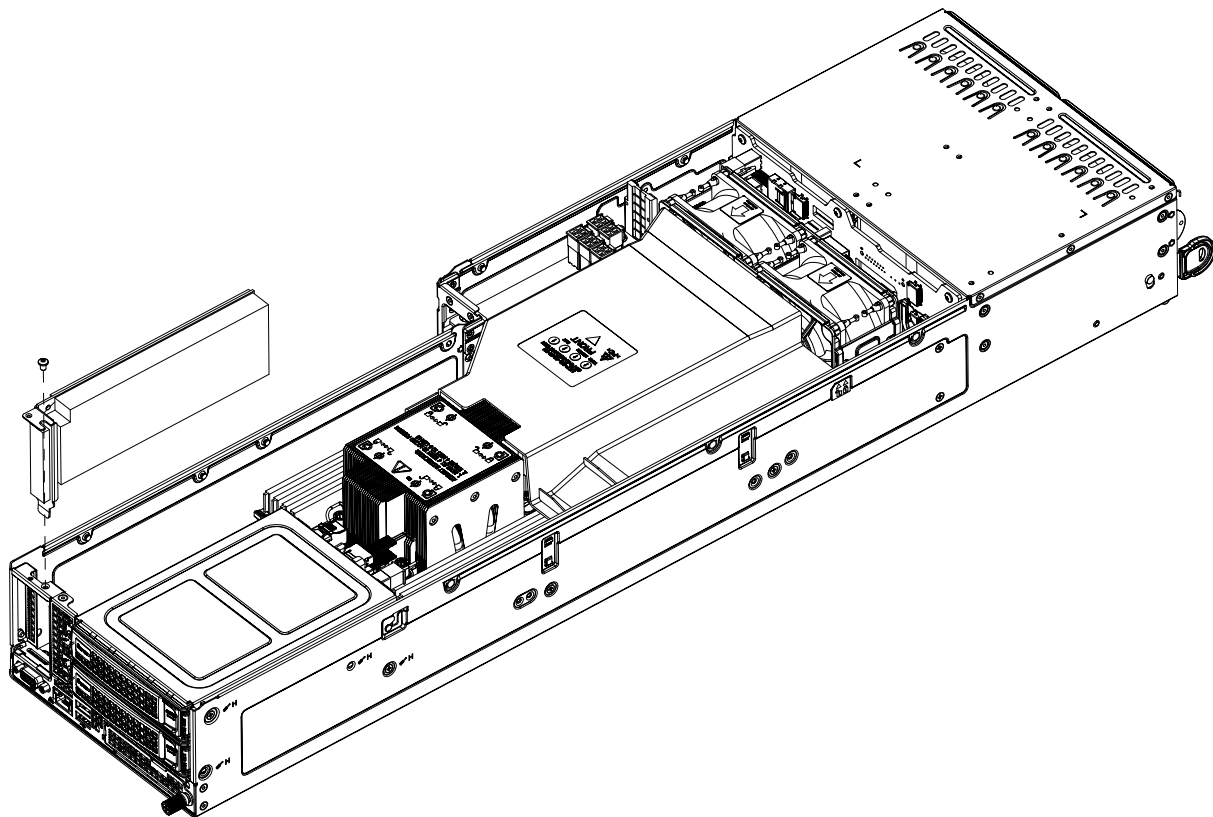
Installing an Expansion Card (w/ 3.5" rear drive bays)
